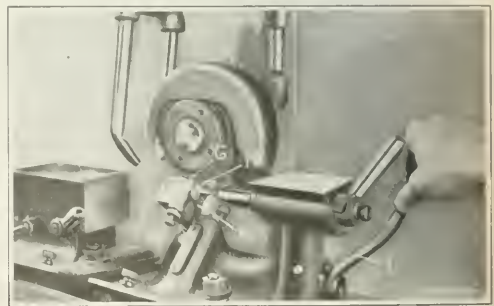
Wheel Truing Device shown in Fig. 27 set for truing Sides of Grinding Wheel
